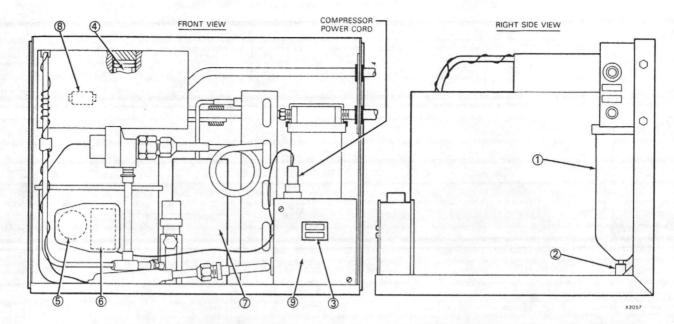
Location of Repair Parts for Hankison Compressed Air Dryers.
